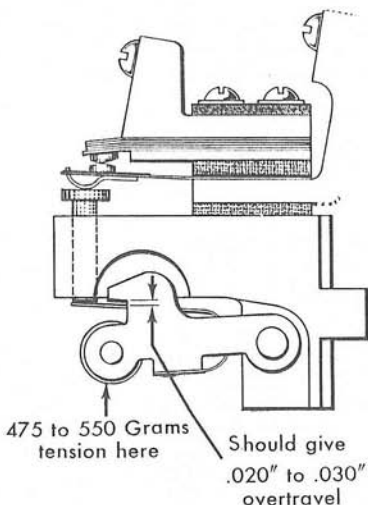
Plunger Circuit Breaker, Roller Cam Follower, Adjustment 3
